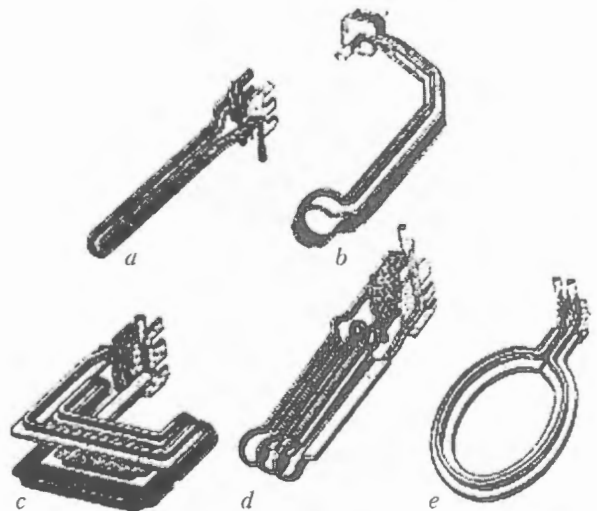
Designs of inductors for surfacing of machine flat parts [1]
